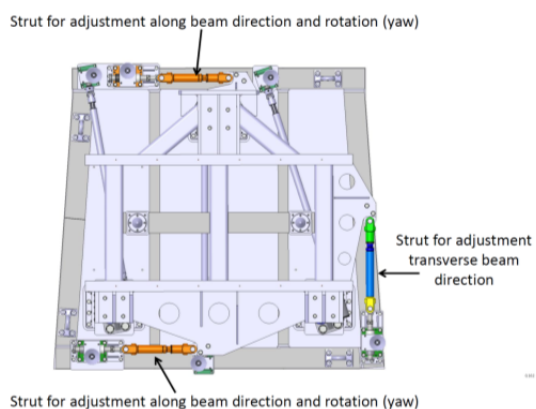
Top view on the support frame. A 3-strut system is used for horizontal adjustments.
